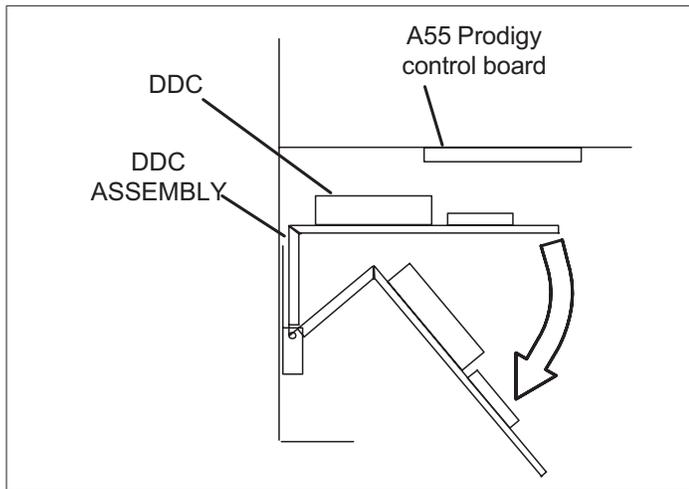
036, 060, 120 Units – Installing DDC Hinged Mounting Panel
